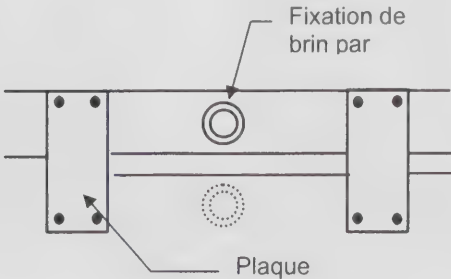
Fixation de brin par écrou serti = Element attachment by lock nut; Plaque isolante = insulating plate.
